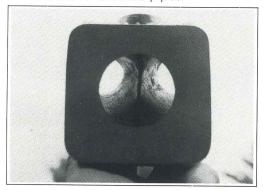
The view the carb sees of the 2 inlet ports (prior to removing casting marks).
